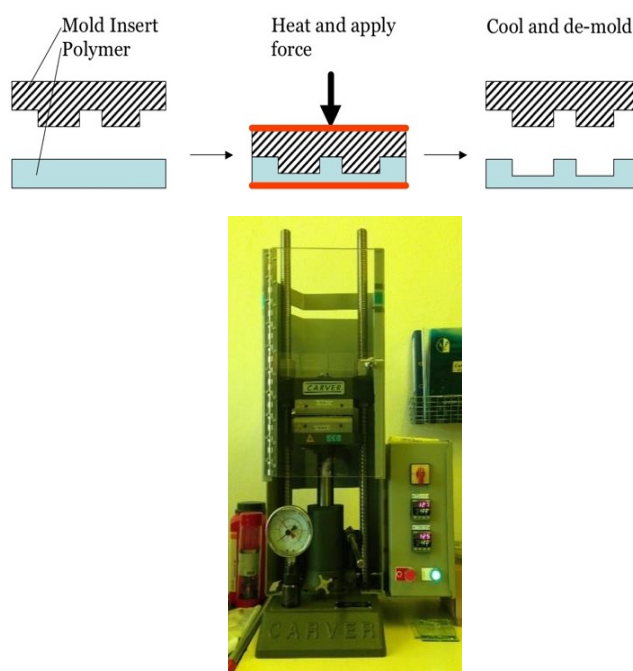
Schematic view of hot embossing process and hydraulic press machine (Carver).
